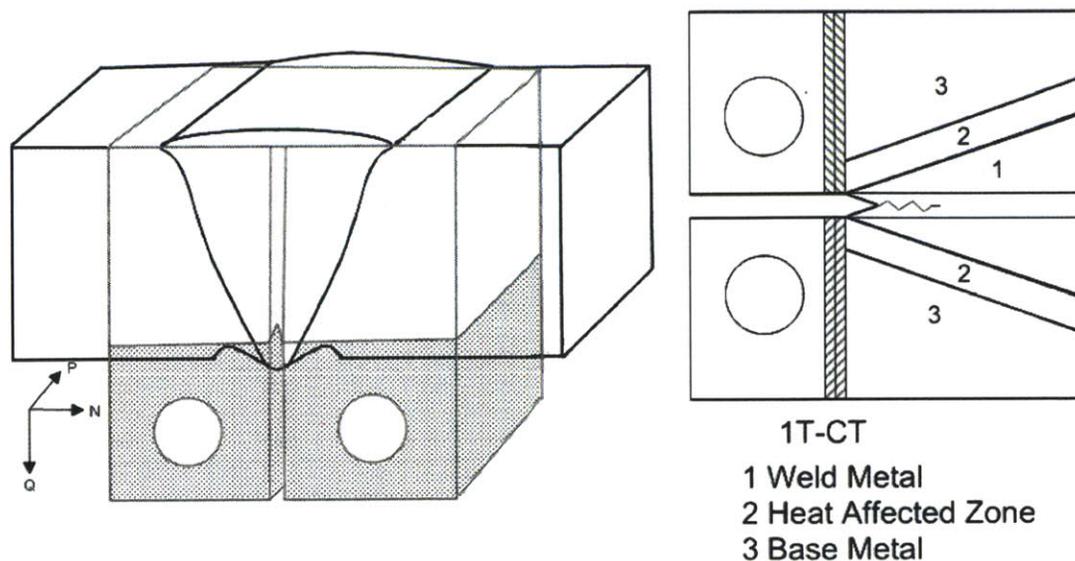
Drawing showing EB weld location for fracture toughness/SCC crack growth specimens.
